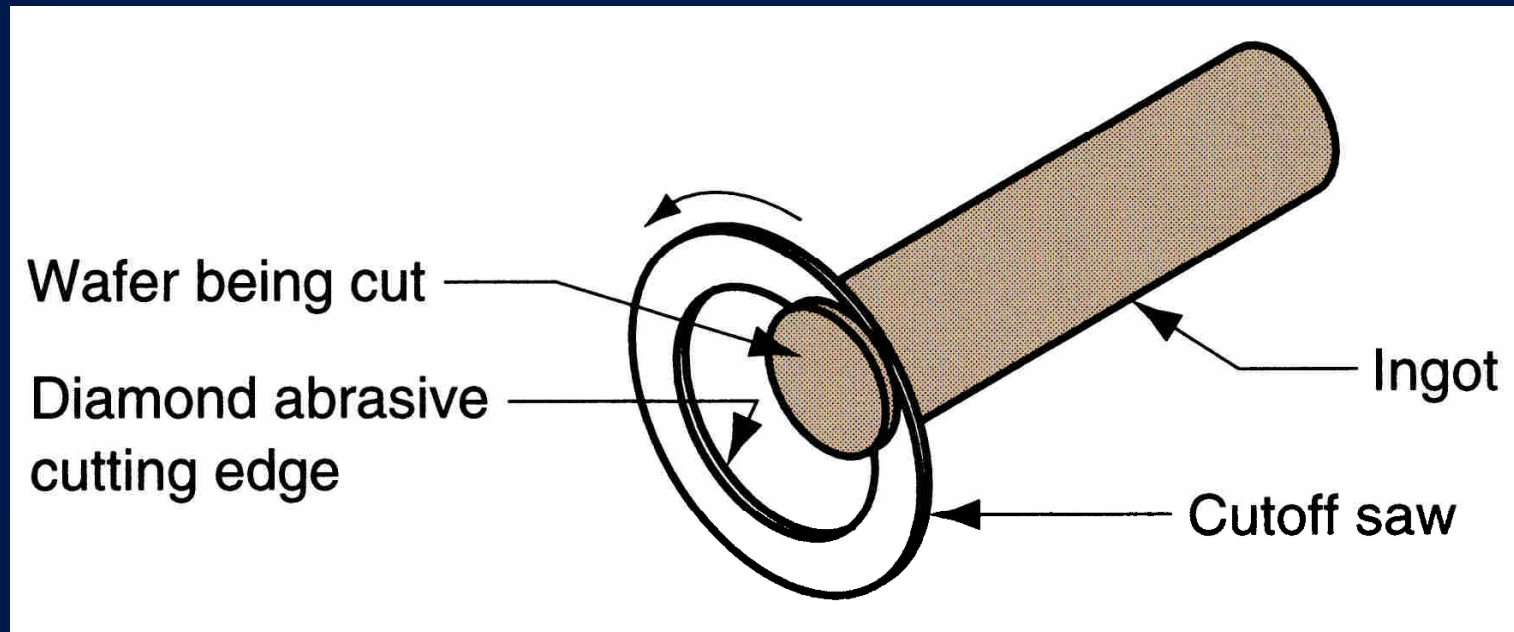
Wafer slicing using a diamond abrasive cut-off saw
